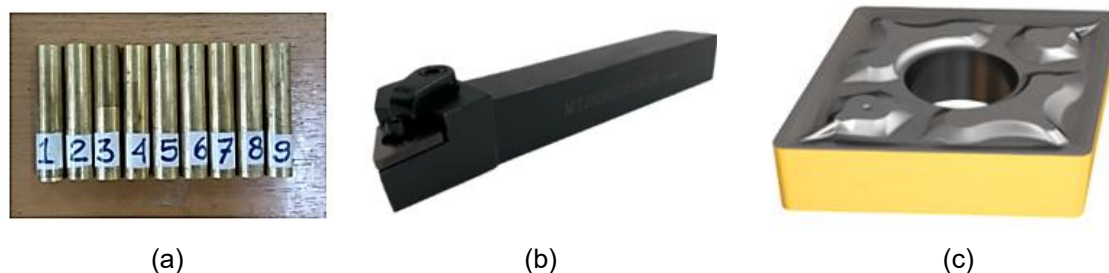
Experimental components used in the CNC turning process: (a) Brass 36000 workpiece, (b) lathe tool holder, and (c) CNMG 120408 TF IC 707 cutting insert
